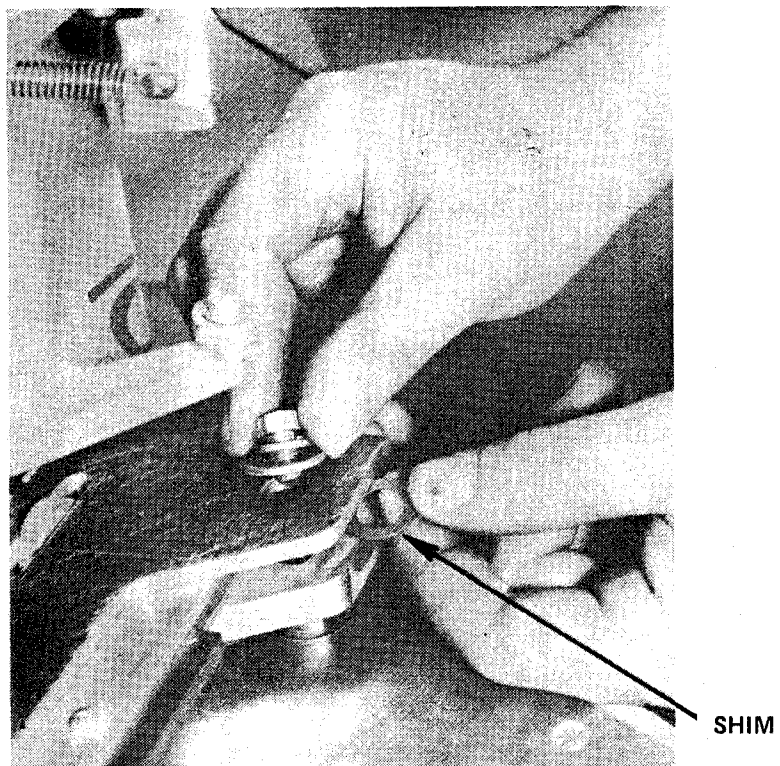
Shimming Between Throwing Arm Carrier and Top of Mainshaft Assembly.
